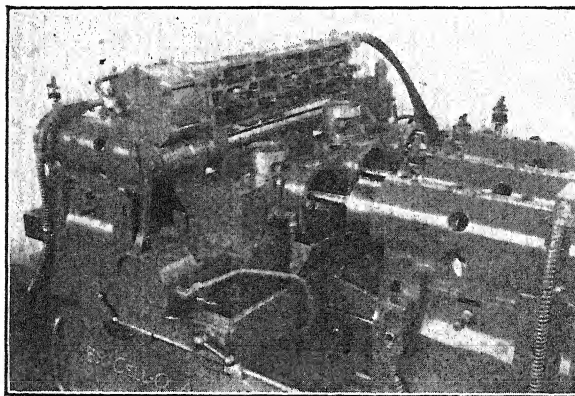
The Ex-Cell-O Corp. Diamond Boring Machine Set Up for Rough- and Finish-Boring a 1-In.-Dia. Piston-Pin Hole in Lynite Pistons.
